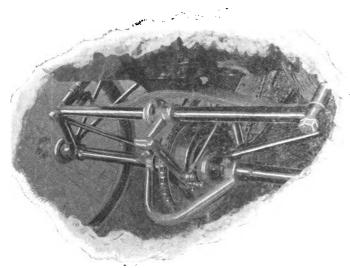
MASON STEAM CARRIAGE.—VIEW OF REAR AXLE FROM RIGHT, SHOWING VARIABLE STROKE PUMP ACTION.
